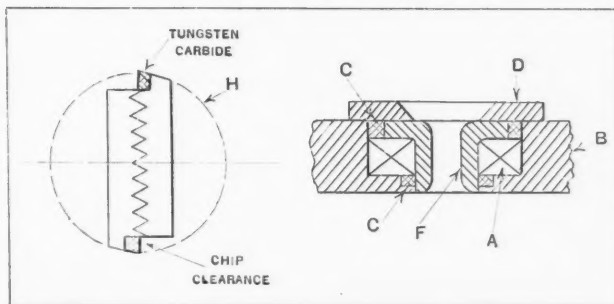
Diagrams Showing Construction of Adjustable Tungsten-carbide Boring Tool and Ball-bearing Bushing for Pilot of Boring-bar
